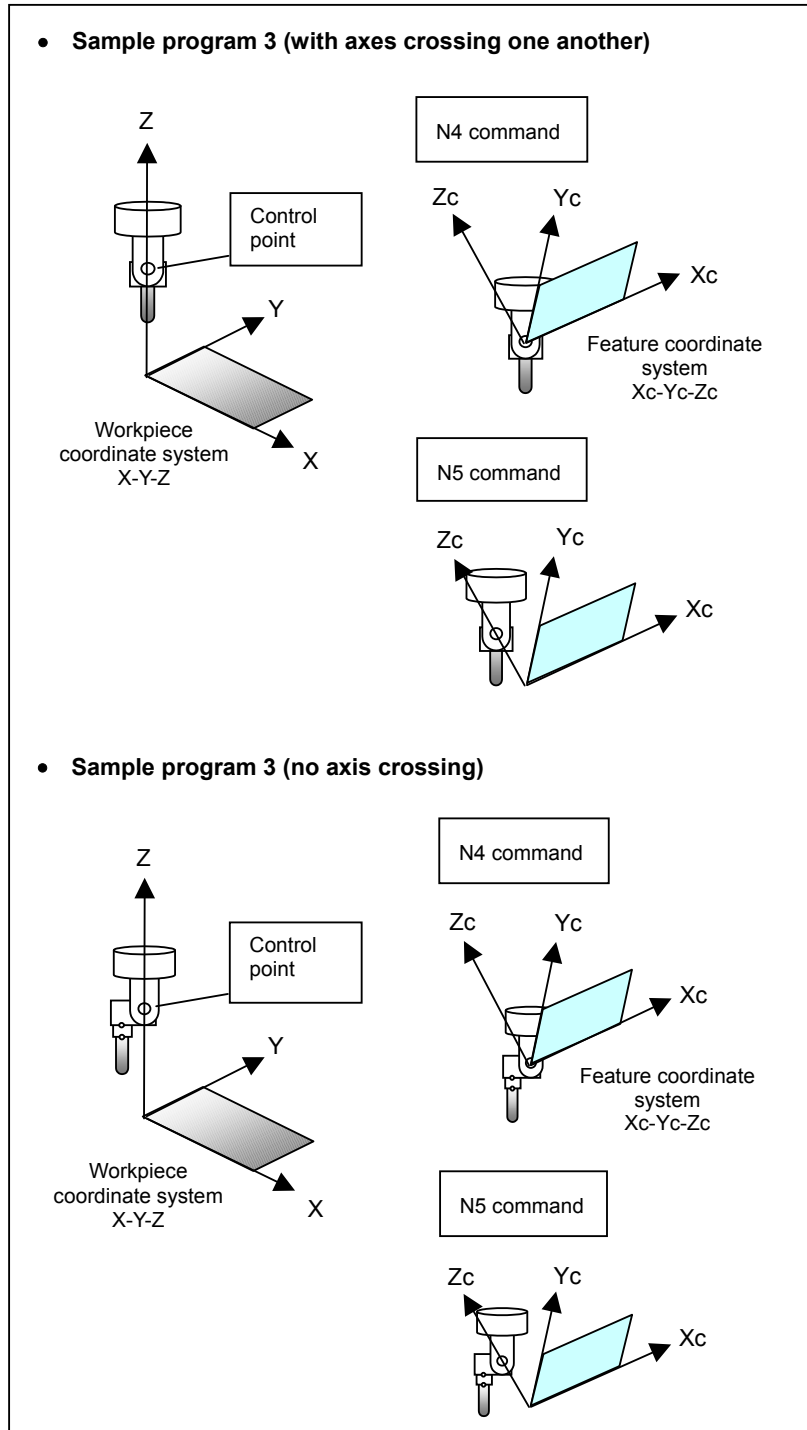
(f) When the tool axis direction control command is not specified
